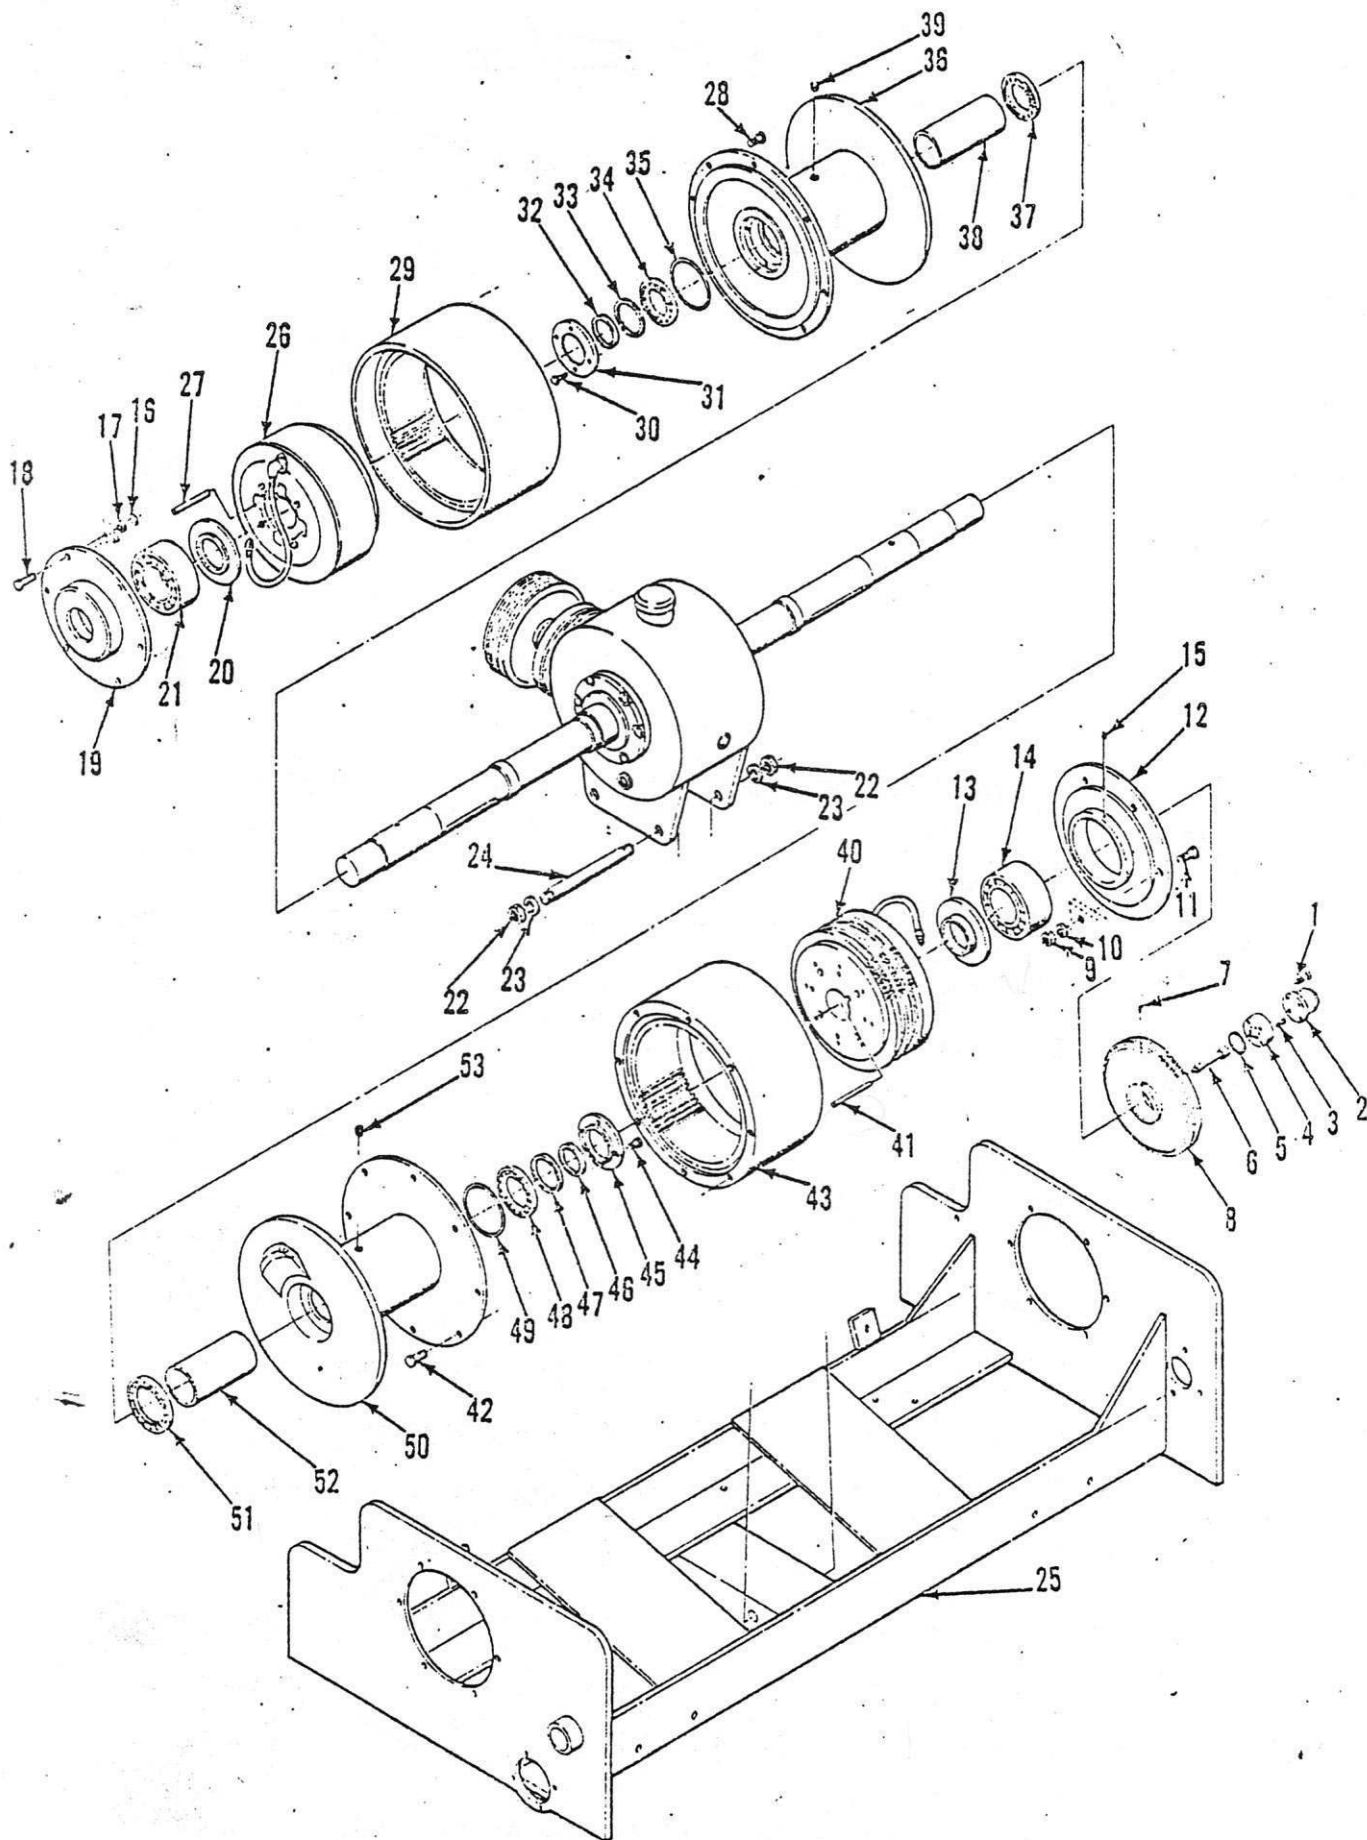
Drawworks and Drive Assembly (View 1 of 2)
